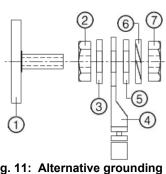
Alternative grounding scheme (less mechanical stress on welding bolt)
